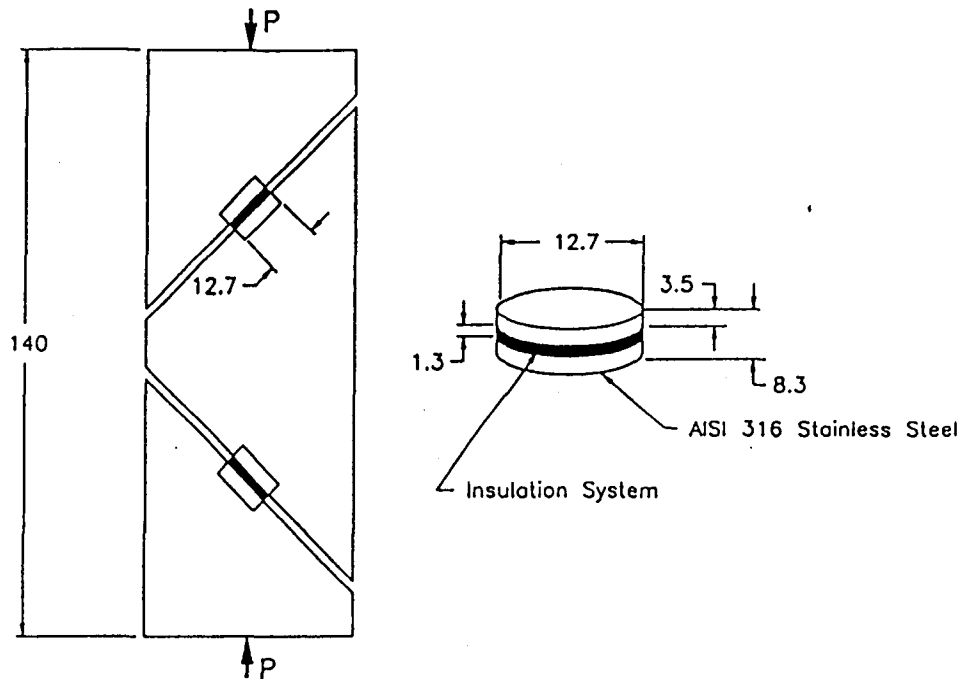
Original shear/compression test fixture and specimen. Dimensions in millimeters.
